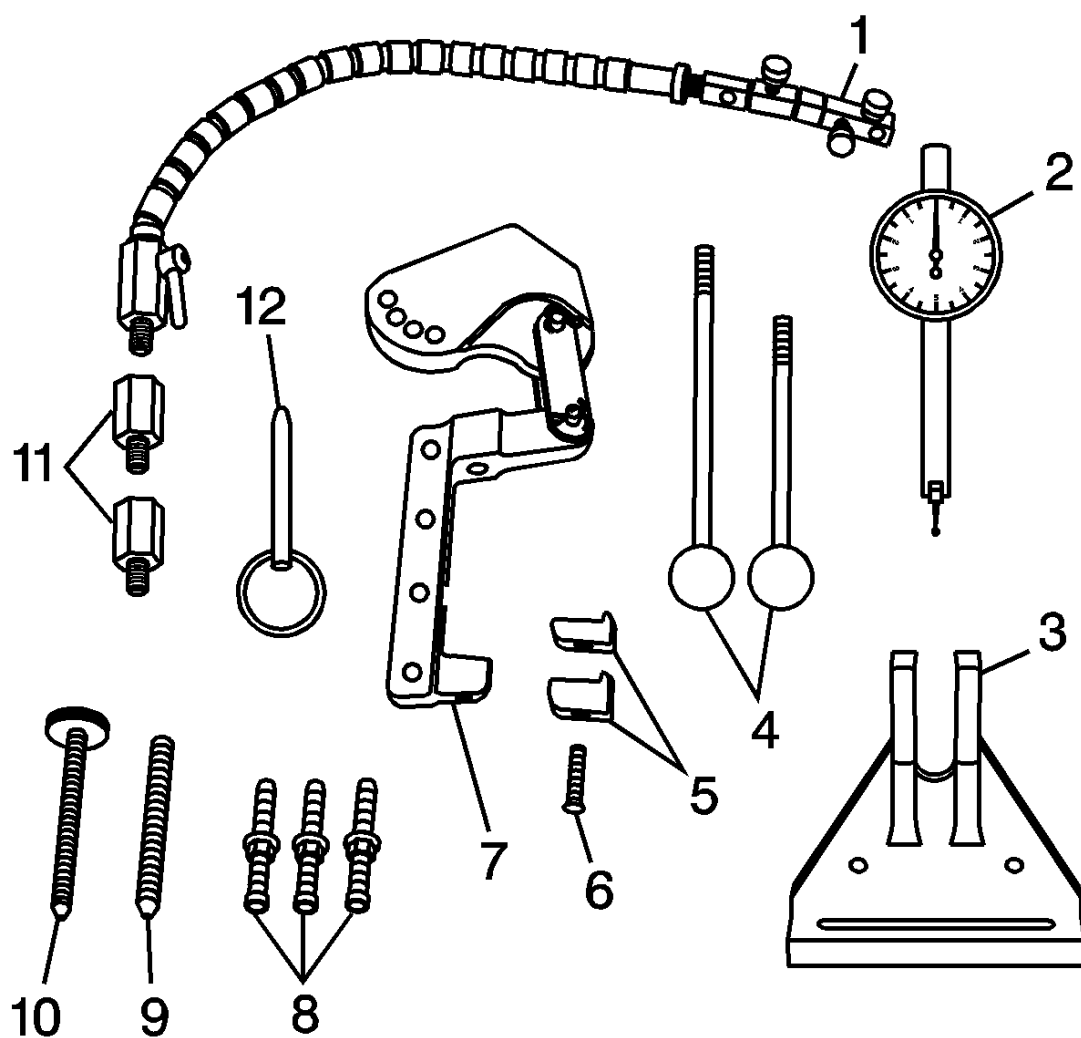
Identifying Rod Bearing Clearance Checking Tool
